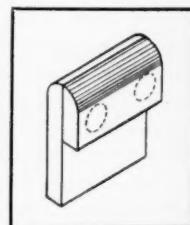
A strip of the same thickness as the metal sheet is spot welded along the edge and finished off in the same manner as in Fig. 1.
